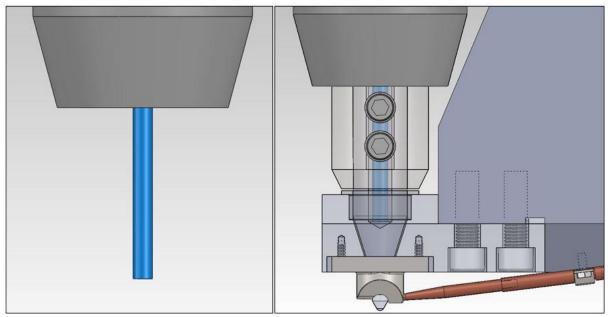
The picture to the left shows the cooling pipe and part of the spindle axis. The picture to the right shows the Probe, Probe Holder and Shoulder in transparent so the interfaces for the cooling pipe can be seen
